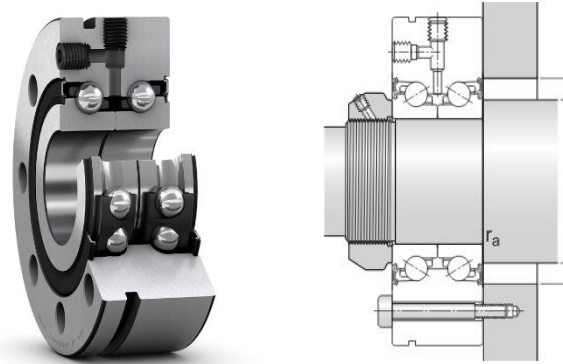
Super precision class back-to-back angular contact ball bearing cartridge
